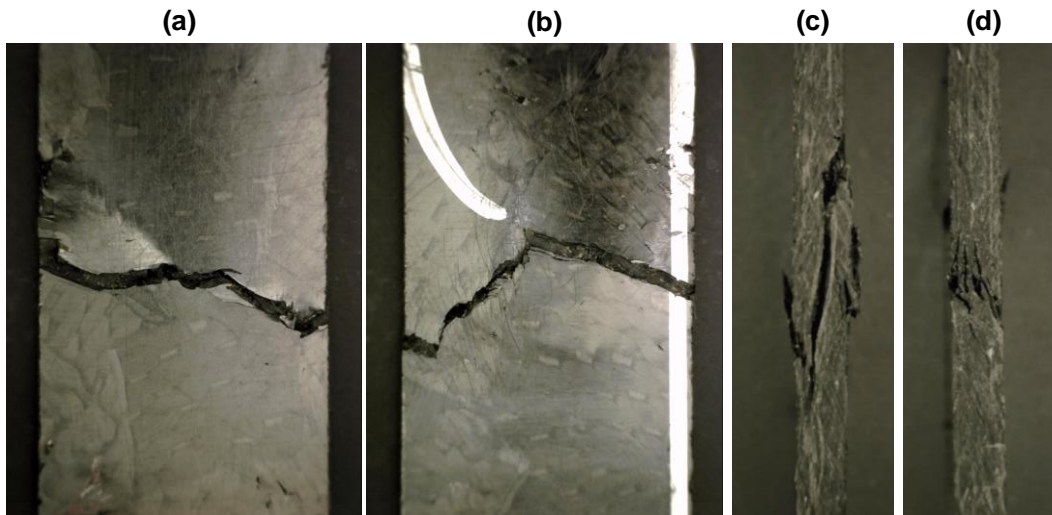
M26 specimen 6 top view (a), bottom view (b), left-side view (c), and right-side view (d). Reported failure mode: angled-gauge-middle.
